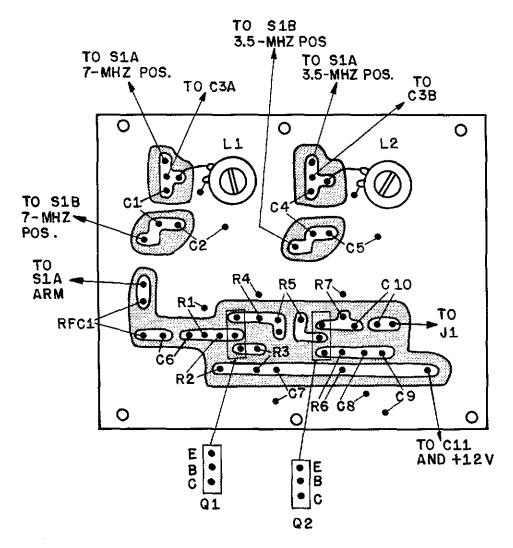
Scale template for the VFO circuit board. A foil-side view is given here.
